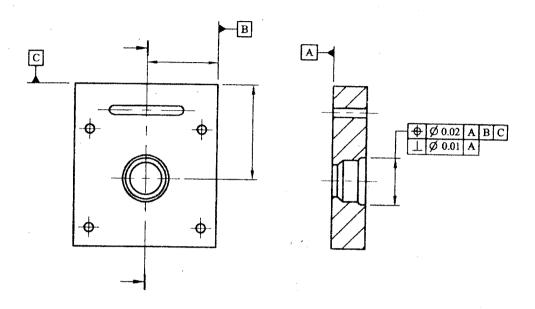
Demonstration of imperfect datum surfaces (drawing indication)
